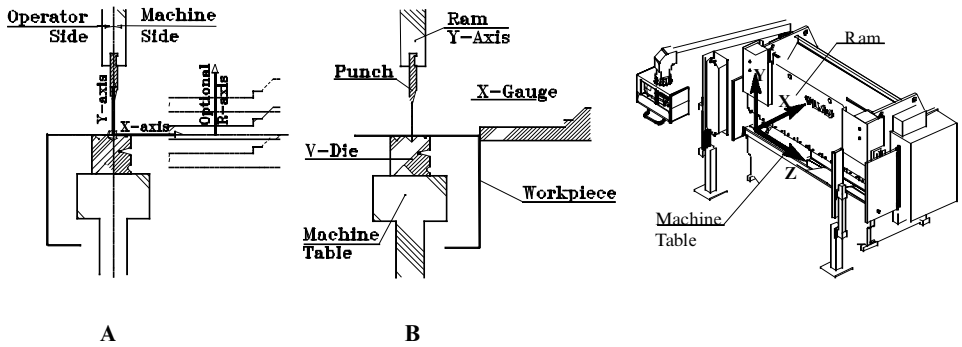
Workpiece orientation options per bend set-up relative to machine geometry.
